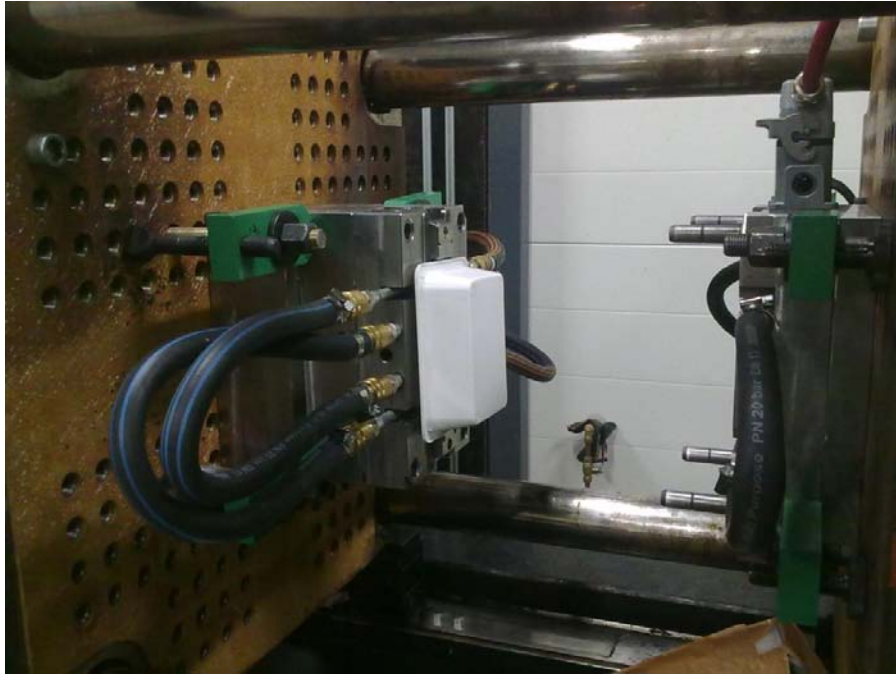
Directional picture of the rectangular tray production from the machine. (Photograph Mikko Ketonen 2011)
